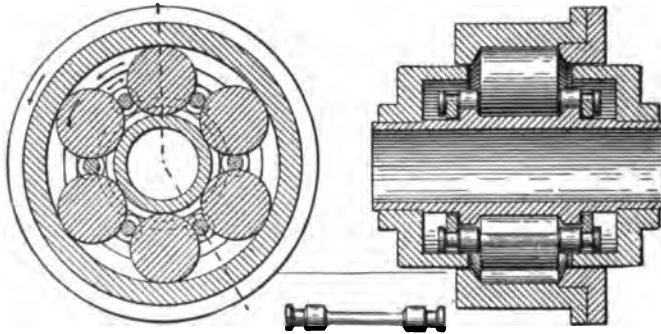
Sectional Diagrams of the "American" Roller Bearing. These bearings are beveled at the ends, as indicated, the bevels taking up the end thrusts, and are separated by smaller rollers, one of which is shown below the larger figures. These separating rollers do not come into contact with the rotating axle.
